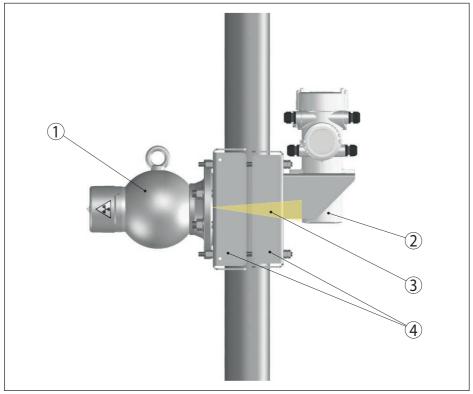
Mounting brackets for mounting on pipes from 50 ... 220 mm (1.97 ... 8.66 in) for 30° diagonal irradiation
